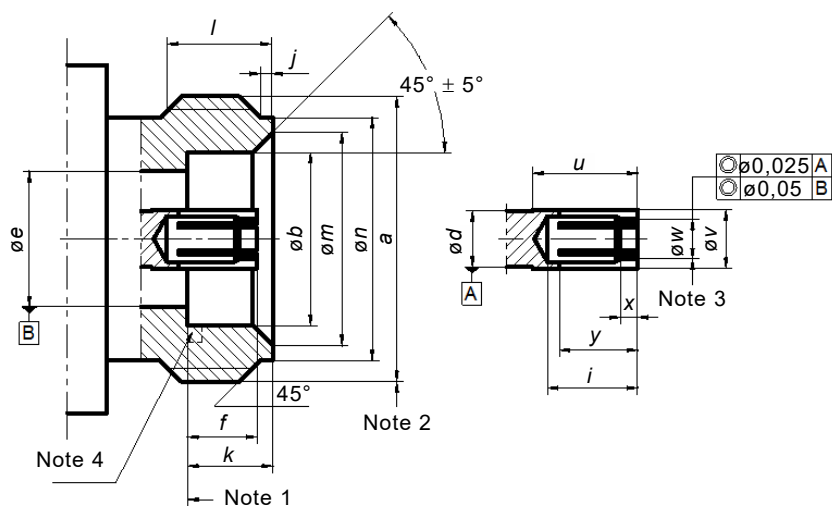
Connector with pin centre contact (for dimensions, see Table 4)Table 4 – Dimensions of connector with pin centre contact
